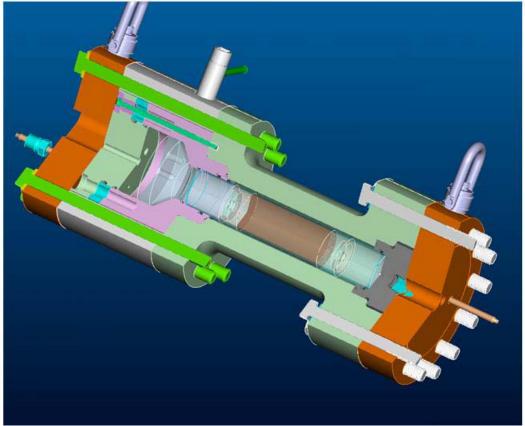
Cutaway drawing of the x-ray transparent geomechanical/geophysical test cell showing the sample (brown), end platens (adjacent to sample ends), and conical piston (transparent, left side) used to apply the axial load.
